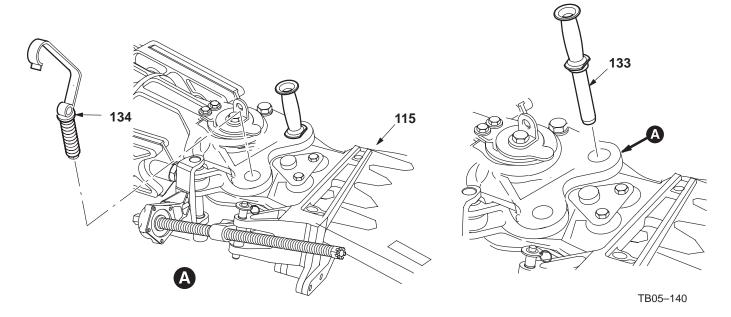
Install Quick Release Fold Pin at Leading Edge and Remove Aircraft Blade Pin from Trailing Edge
